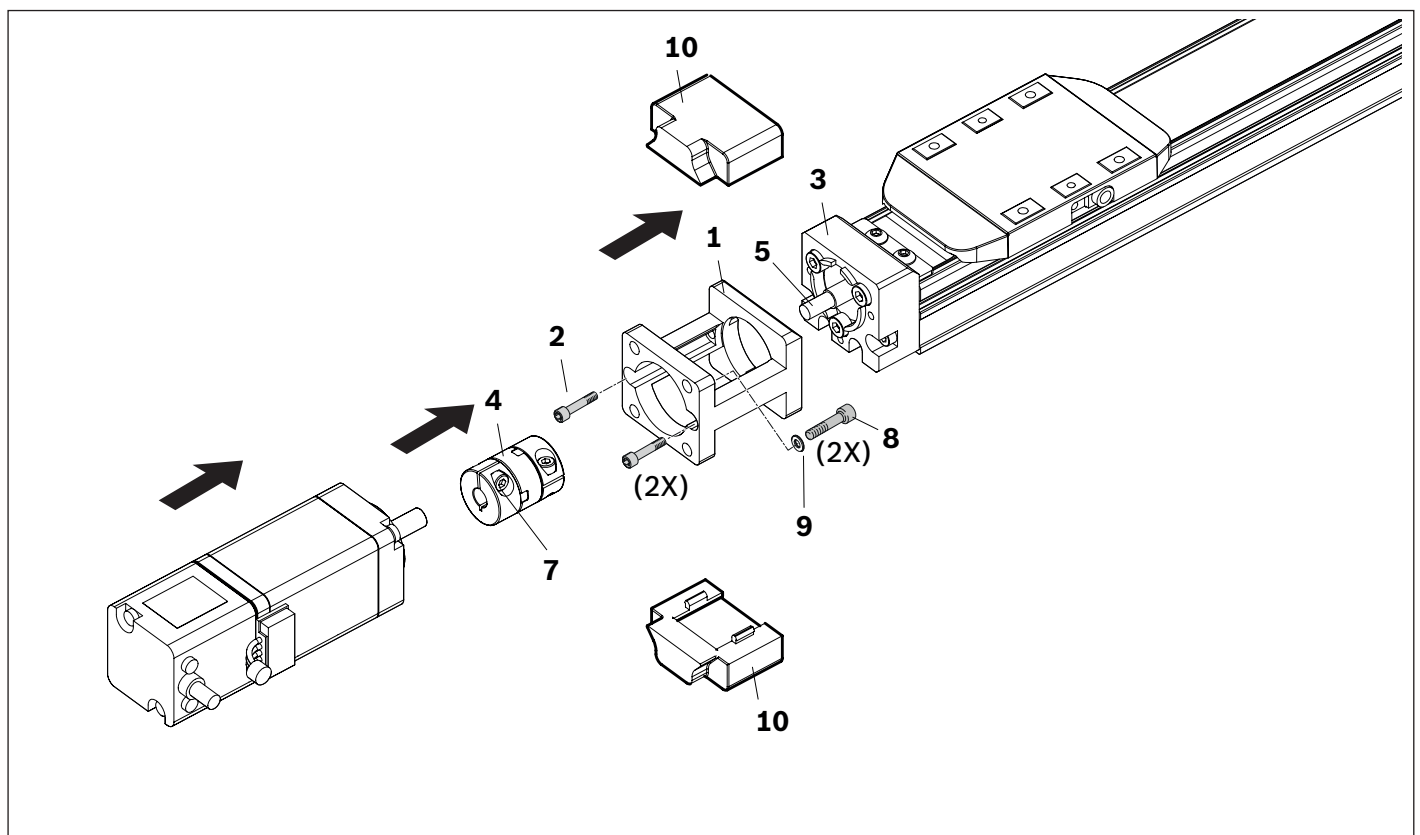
Mounting the motor with flange and coupling (SMS-030)
